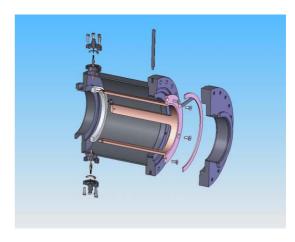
An exploded view of the sectional cut of the beam position monitor.
